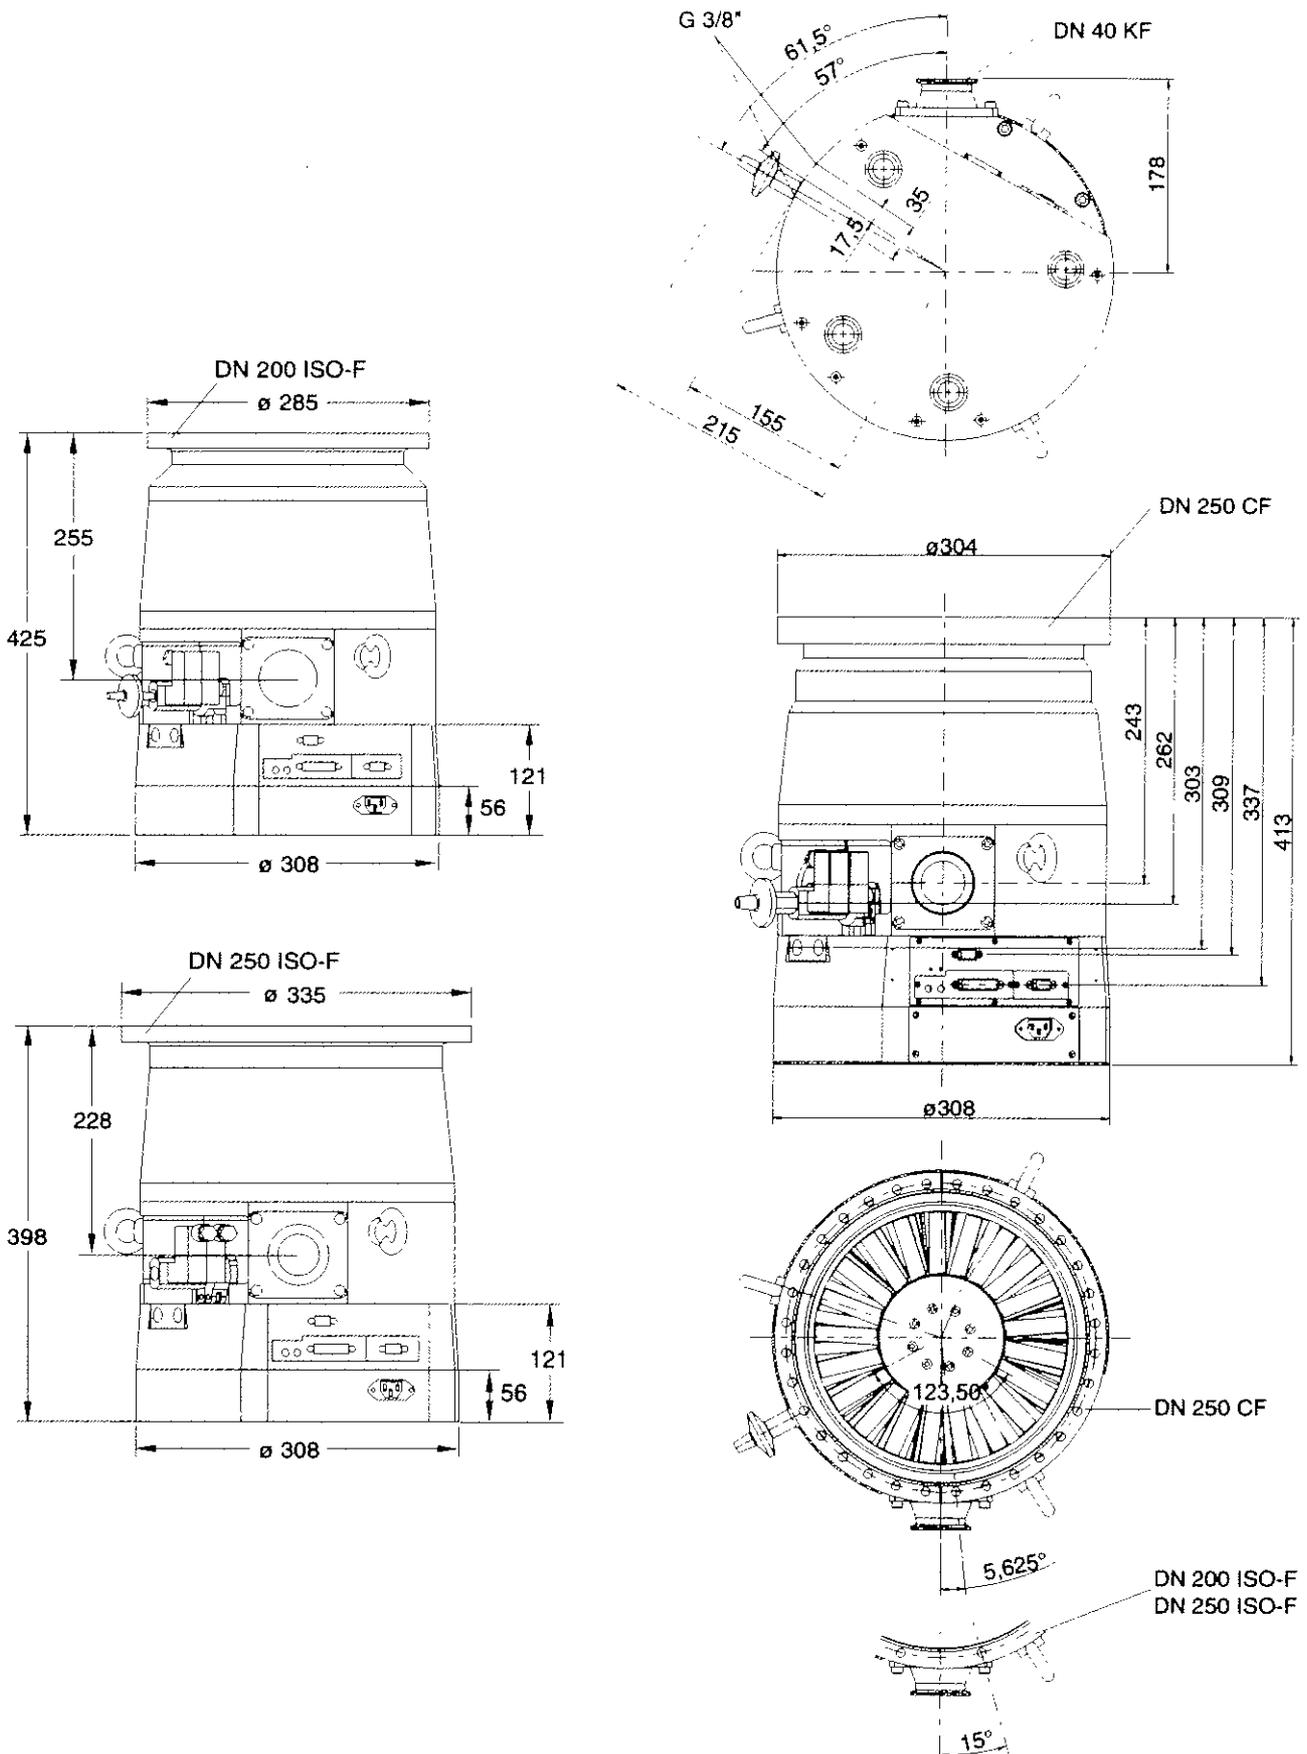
Dimensional drawings for the T 1600; dimensions in mm
